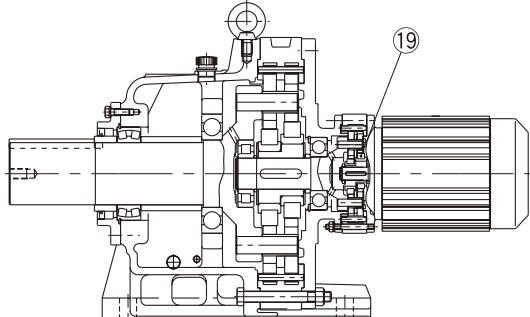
Type CHHM (Horizontal, Gearmotor)
